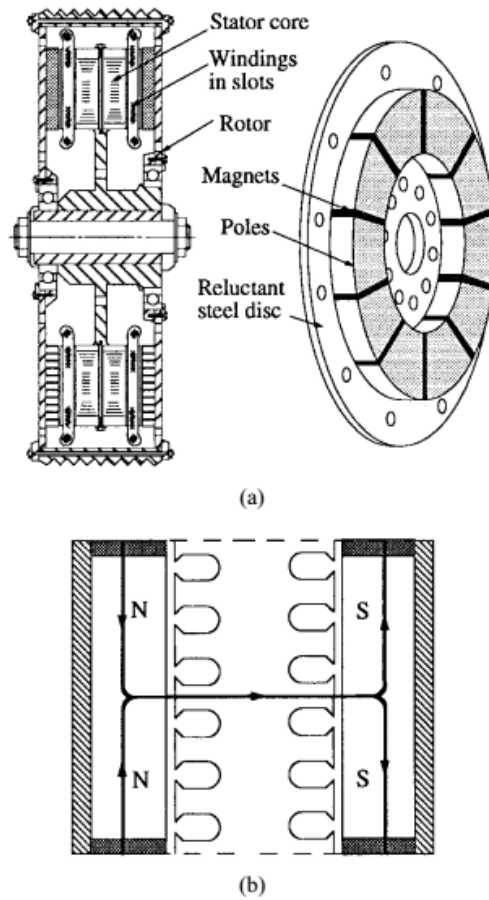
AFIPM motor. (a) motor overall structure. (b) Motor axial section.
